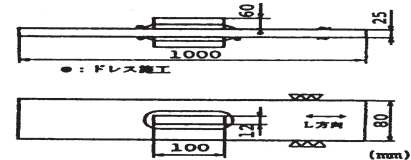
Basic welded specimen with longitudinal rib.
